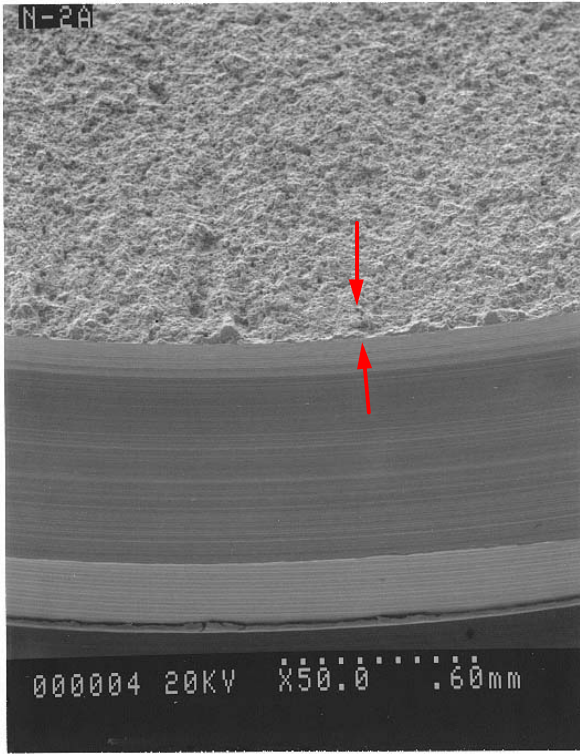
Specimen N-2A after the test. Fracture face (below) shows initiation and reflective band (between arrows) at bottom of view and final shear lip at top.
